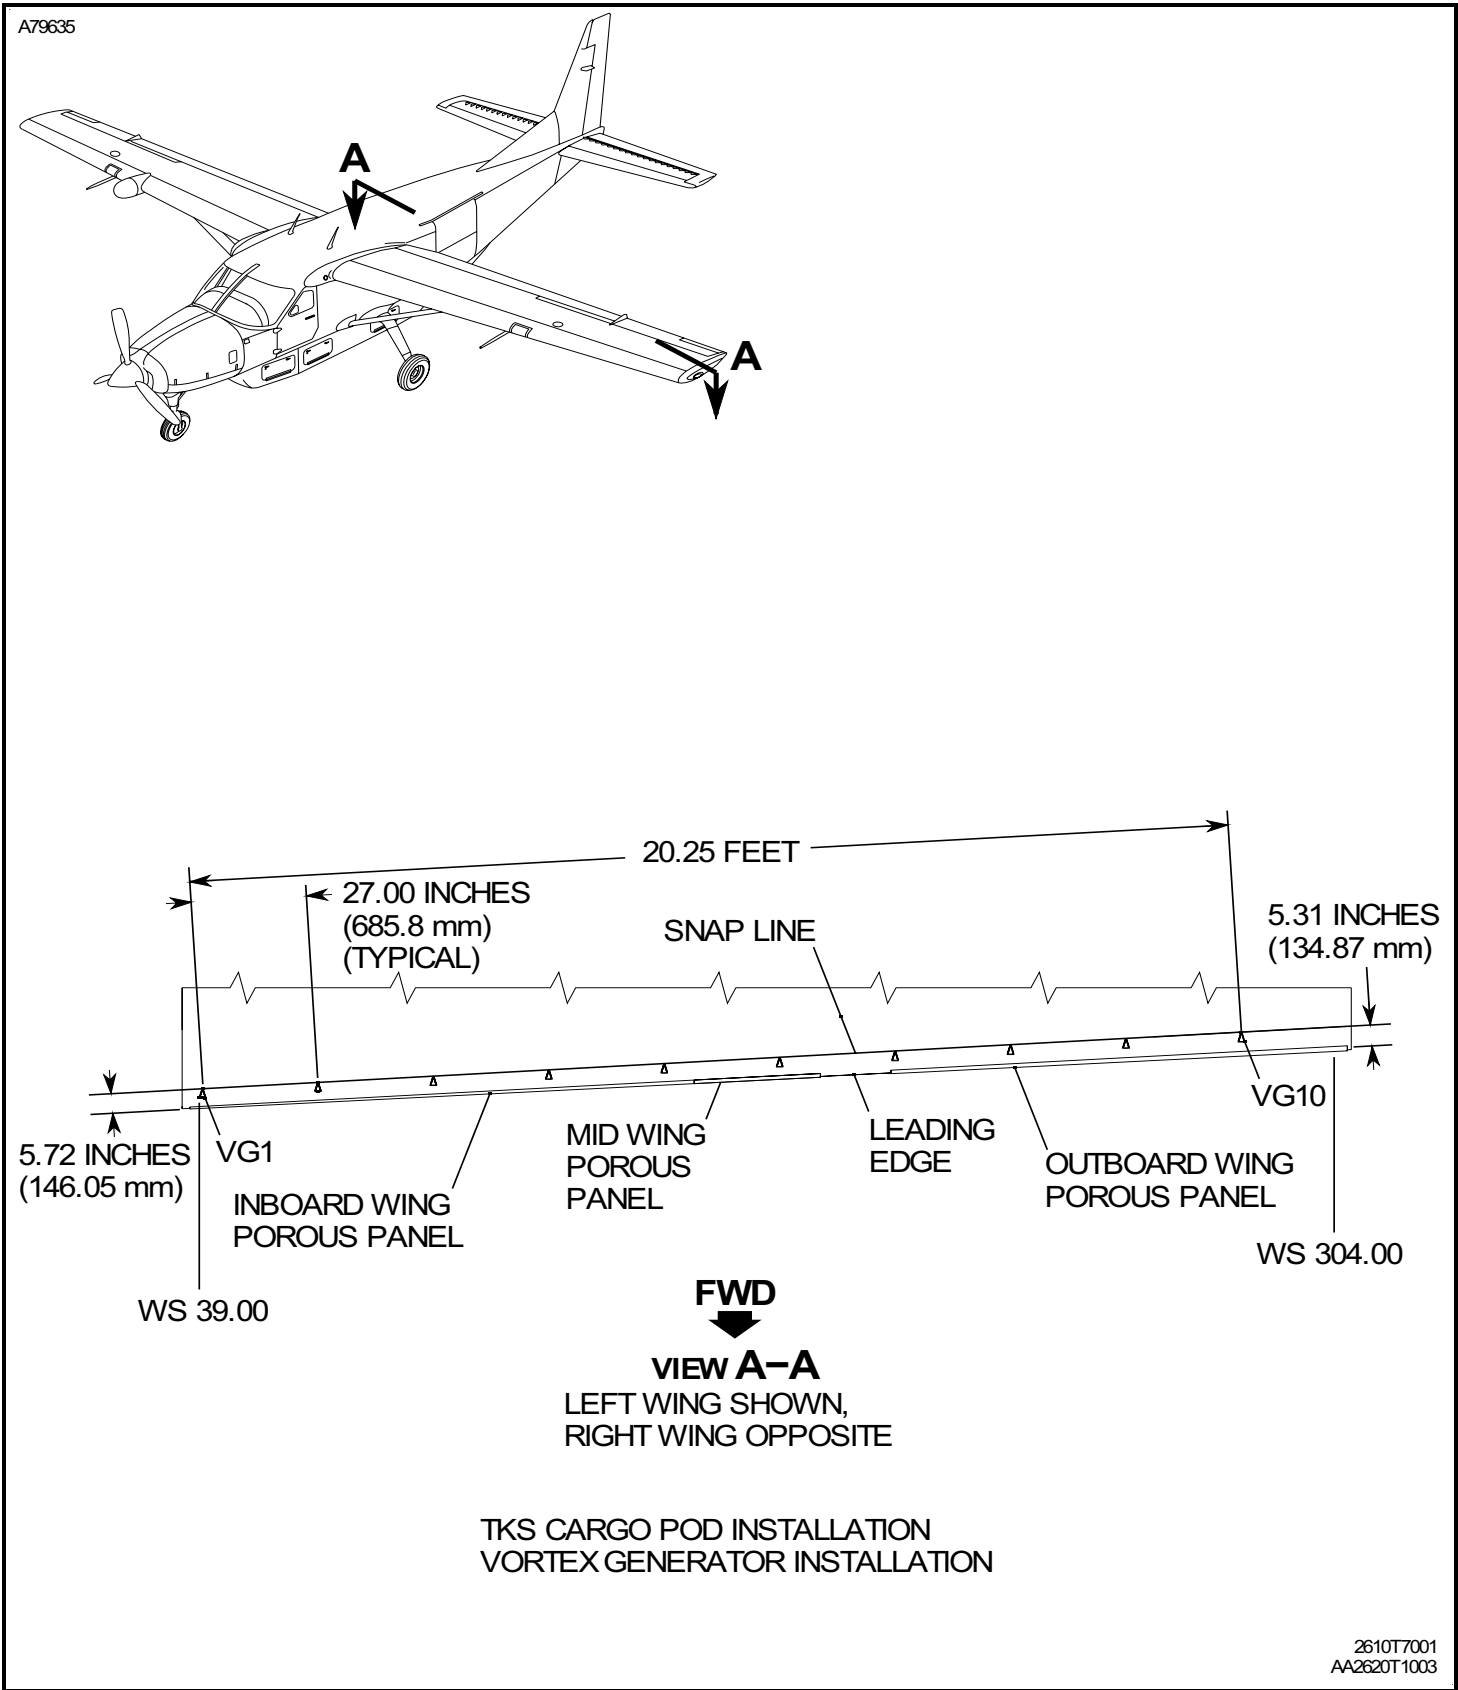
Sheet 1 : TKS Fairing Vortex Generator Installation
